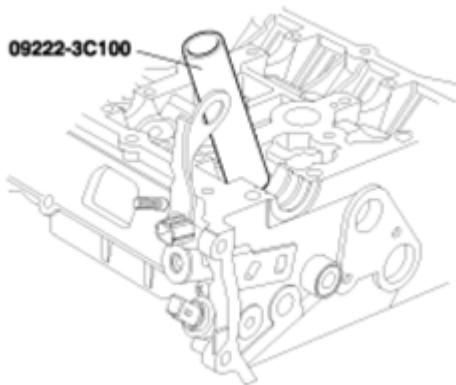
Pushing New Oil Seal Using SST (09222-3C100)
